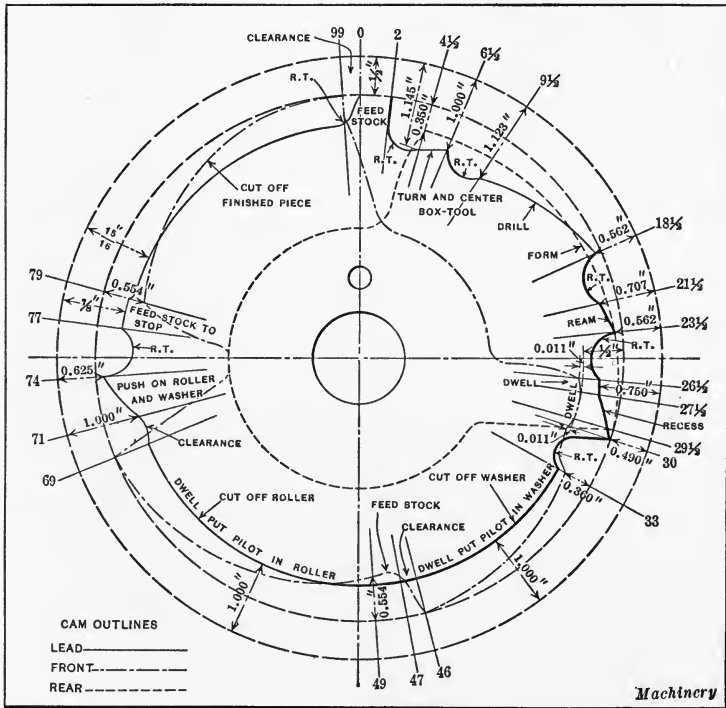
Lay-out of the Cams for Machining and Assembling Operations
